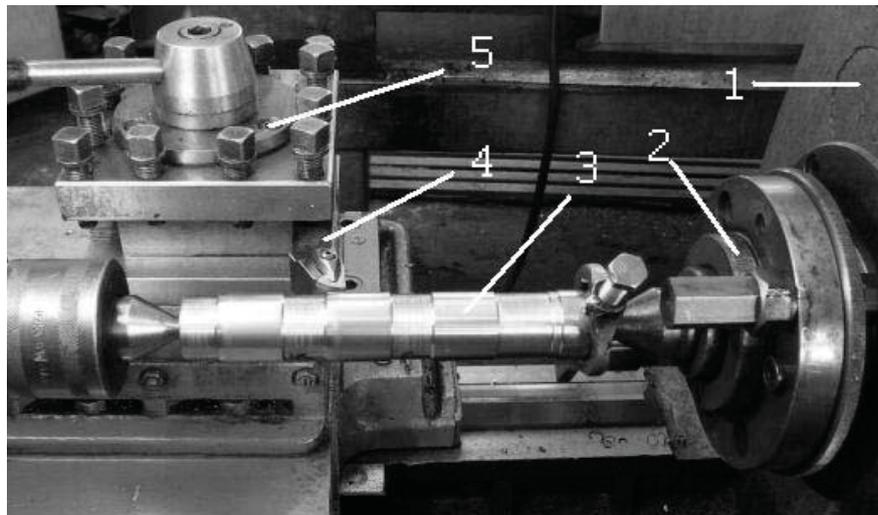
General view of OUPN tooling system (machine, grip, object, tool): 1 – TUC40 lathe, 2 – catch plate, 3 – work piece object, 4 – cutting tool, 5 – tool post
